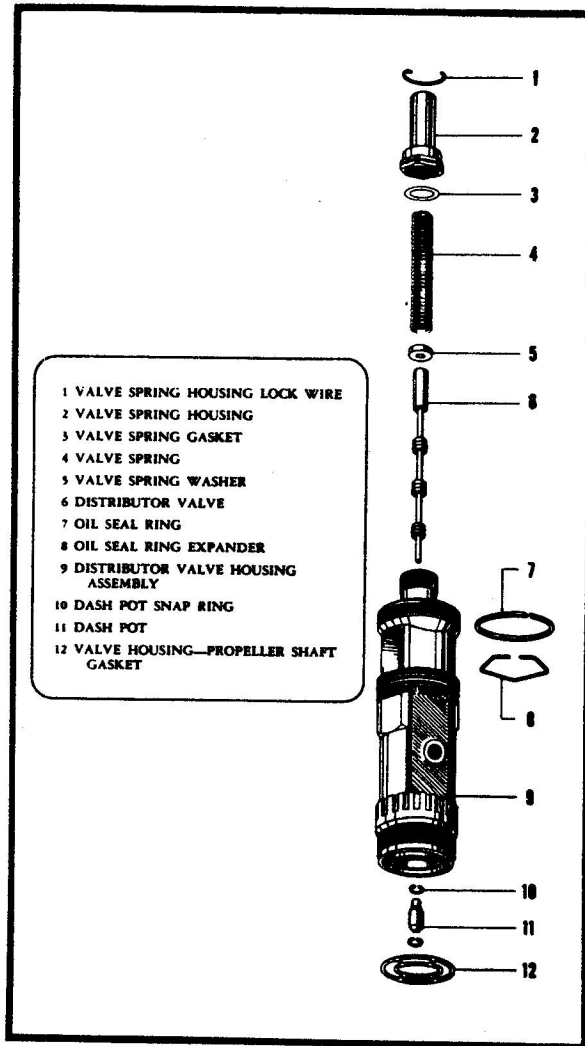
Distributor Valve Assembly for Models 24E60, 23F60, and 24F60
